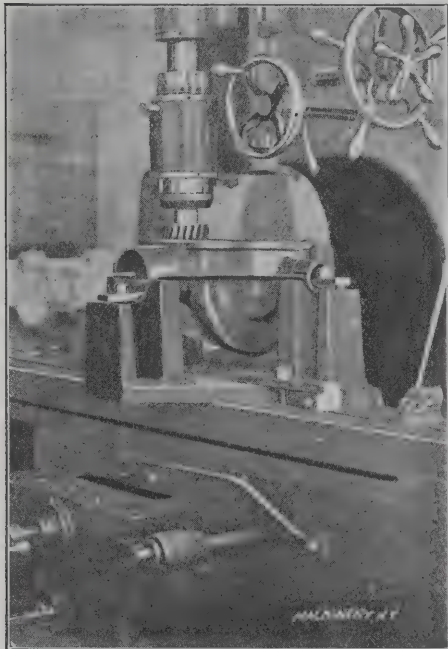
Facing Seats of Differential Covers in a Vertical Milling Machine
